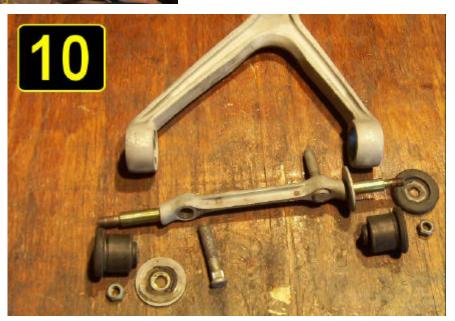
Thread one of your 19mm bolts back on the end of the spindle and strike it sharply with a hammer to drive the spindle out through the frame. Then you can remove the spindle from the A-frame and it will look like picture #9. Use a drift and drive out the other rubber bushing on the other side and lay out all the parts on the bench. At this time your upper A-Arm with the bad bushings should look like picture #10.
